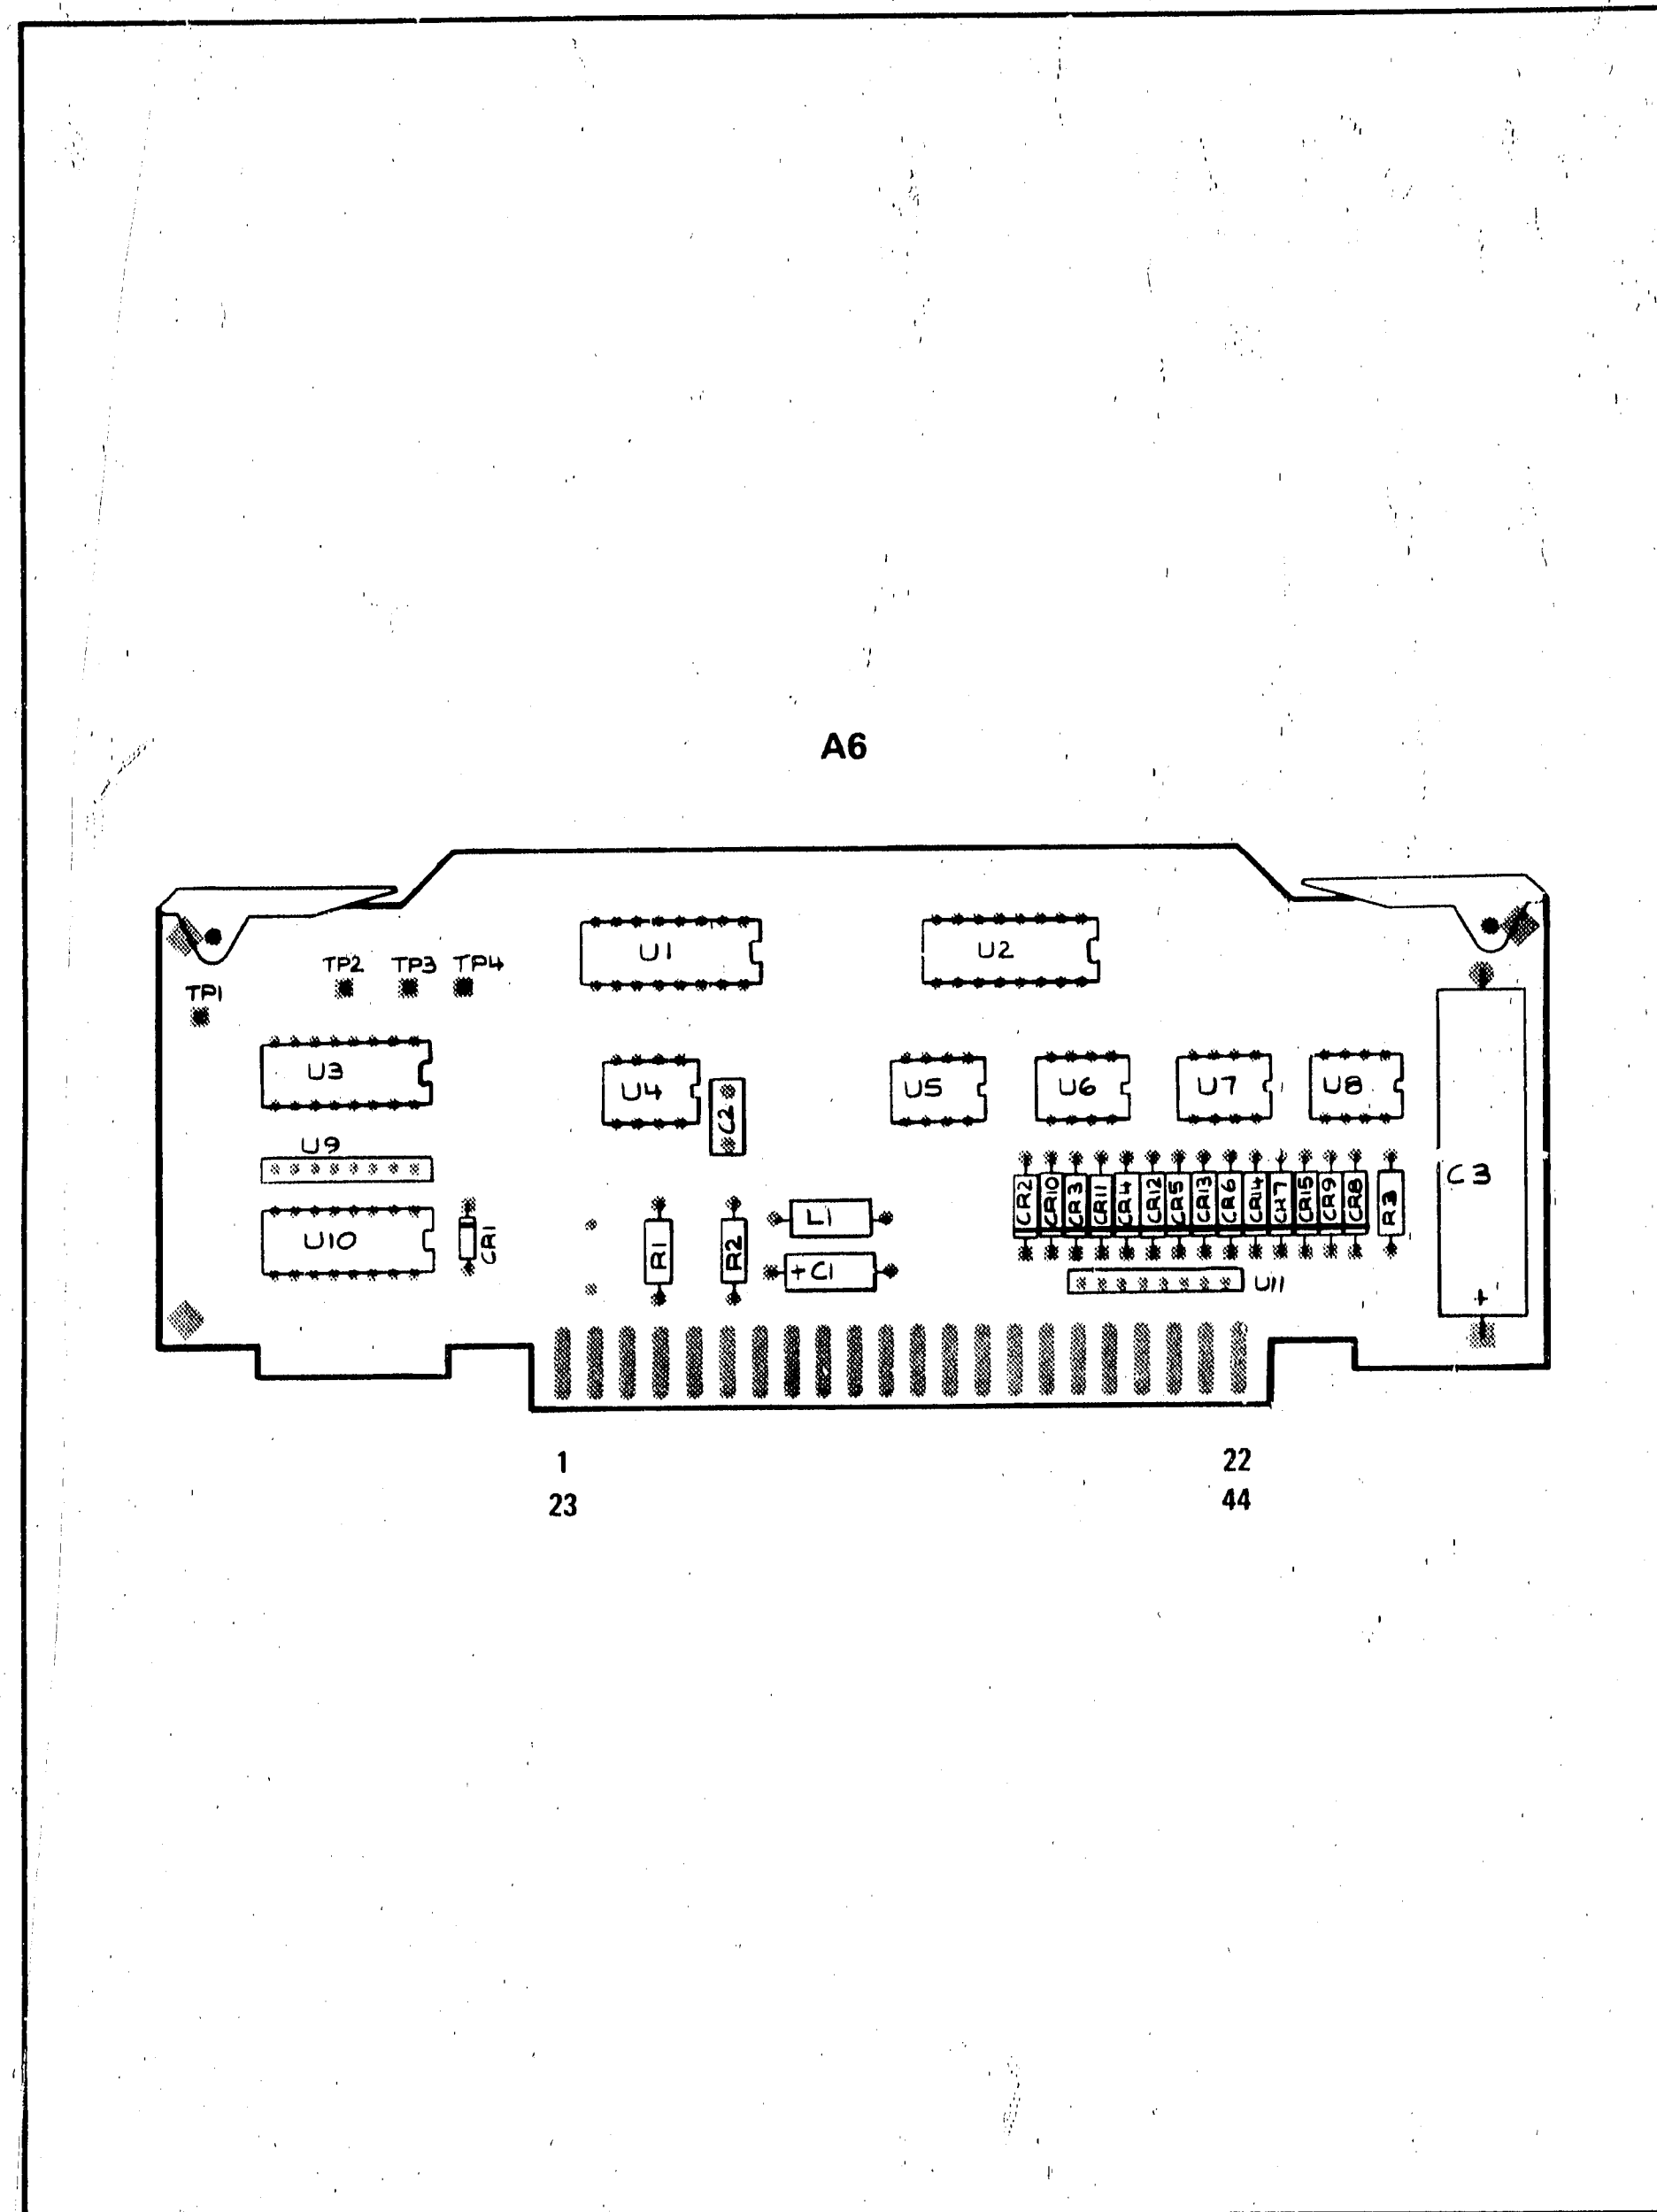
A6 Decoder/Driver Assembly, Component Locations
